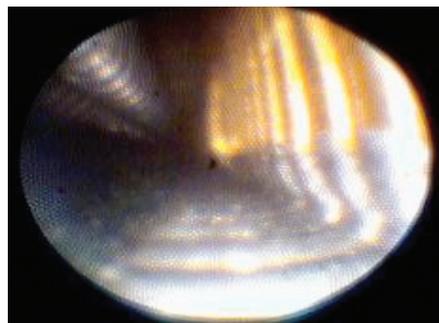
Gullwing inspection of heel fillet directly in situ with a flexible endoscope.
